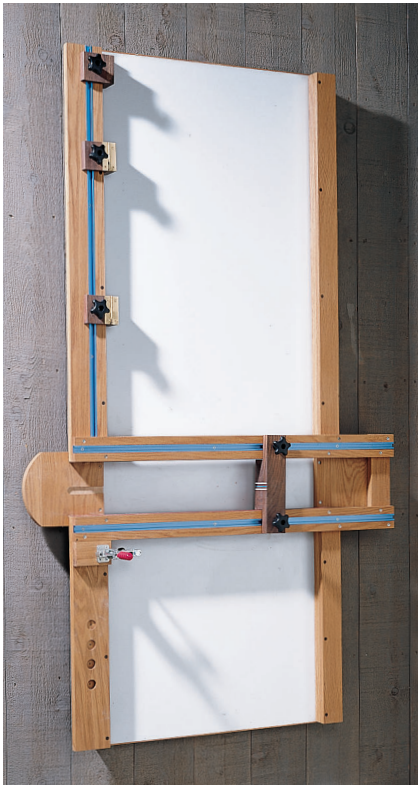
Attach the rails to the melamine deck with screws and glue. Cover the exposed screw holes with walnut plugs.
